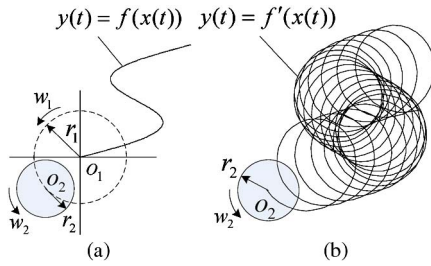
Motion trajectory of dual-rotor polishing head. (a) Dual-rotor mechanism and (b) dual-rotor path.
